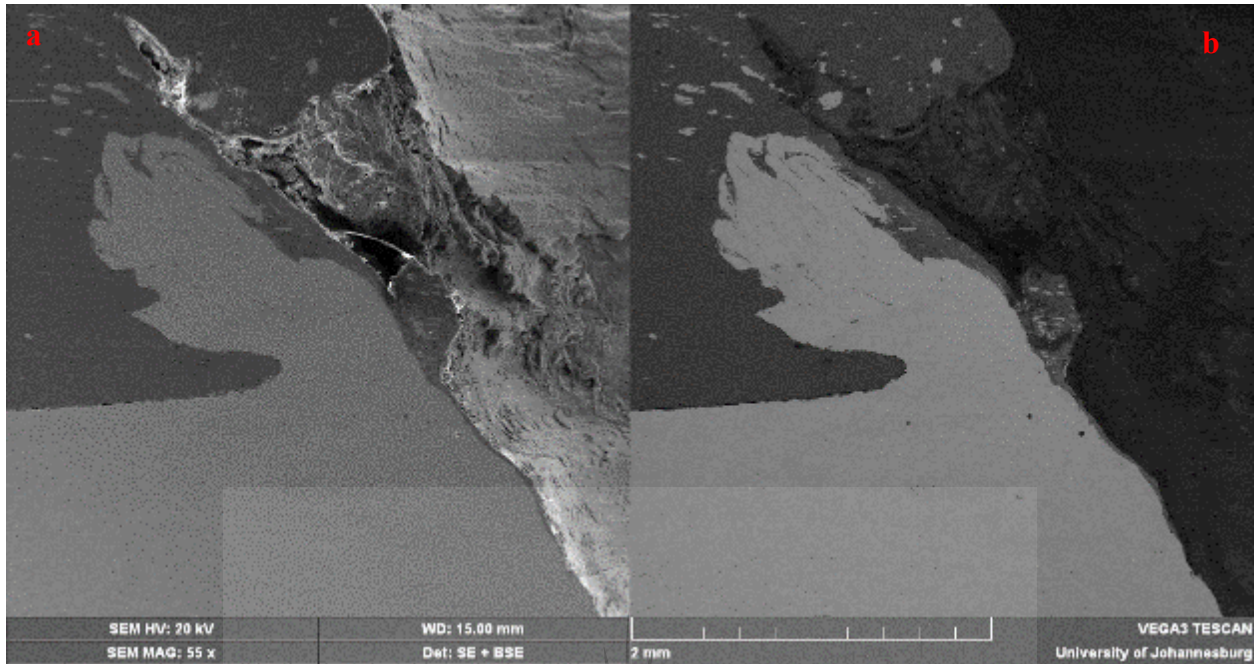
Showing a secondary electron (a) and a backscattered electron (b) images of the spot weld produced at 1200 rpm and 0.5 mm plunge depth, using a conical pin and a concave shoulder tool
